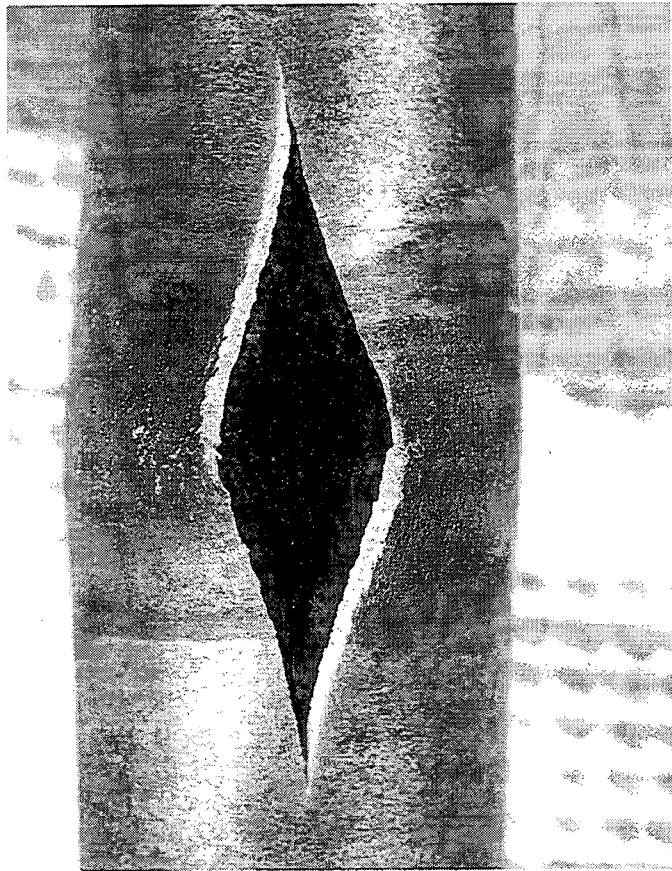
TSP2 crevice region Specimen 6B of Tube R15C28. Appearance of the 135° face after the burst test. Mag. 2.5X.
